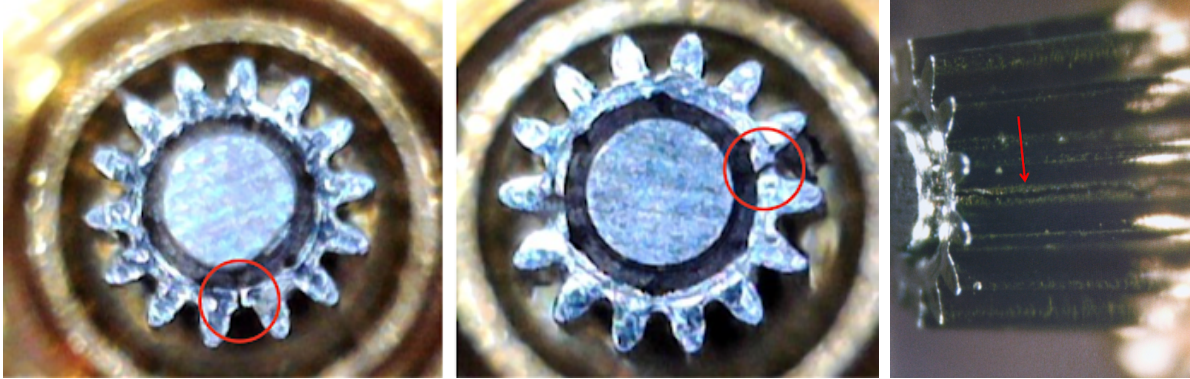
An example of a cracked pinion gear on the motor shaft. The two left images show examples of cracked pinions, circled in red. The right image shows a different view of the cracked pinion (red arrow pointing toward the crack) and how the gear has started to slip axially down the motor shaft.
